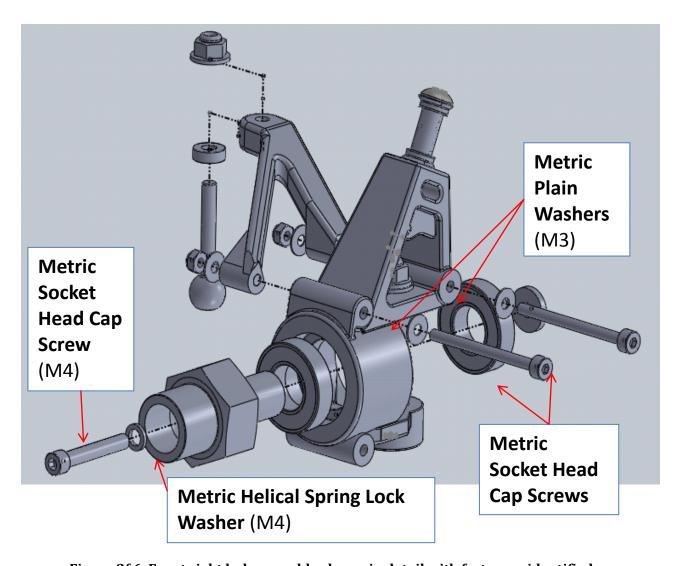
6. Front right hub assembly shown in detail with fasteners identified.
